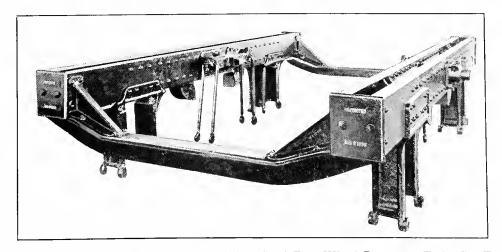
Frame for Pennsylvania Railroad Al 1-Steel Four-Wheel Passenger Train Car Truck.
